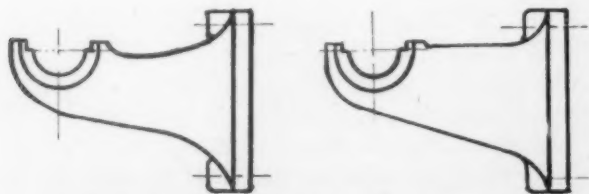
CURVED SURFACES REQUIRING HAND FINISH OF PATTERNS (LEFT) MORE COSTLY THAN STRAIGHT SURFACES (RIGHT).
